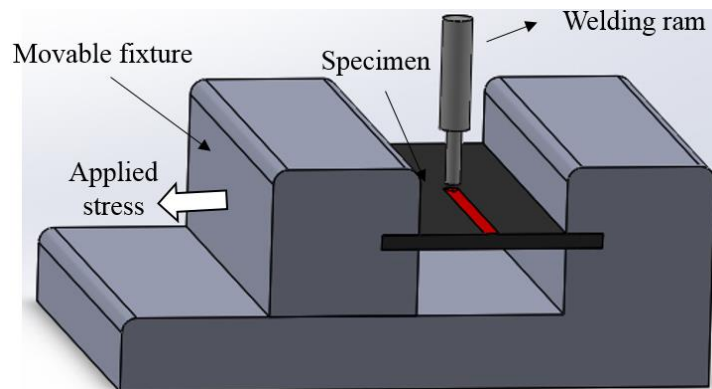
Schematic of a Sigmajig testing fixture (inspired from [23]).
